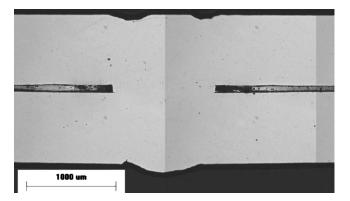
Transverse cross-sectional view of the lap weld illustrated in Fig. 7, showing freedom from vapor-induced defects.
